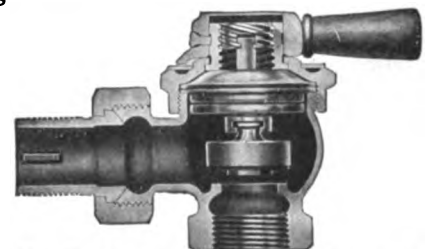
DUNHAM PACKLESS RADIATOR VALVE
